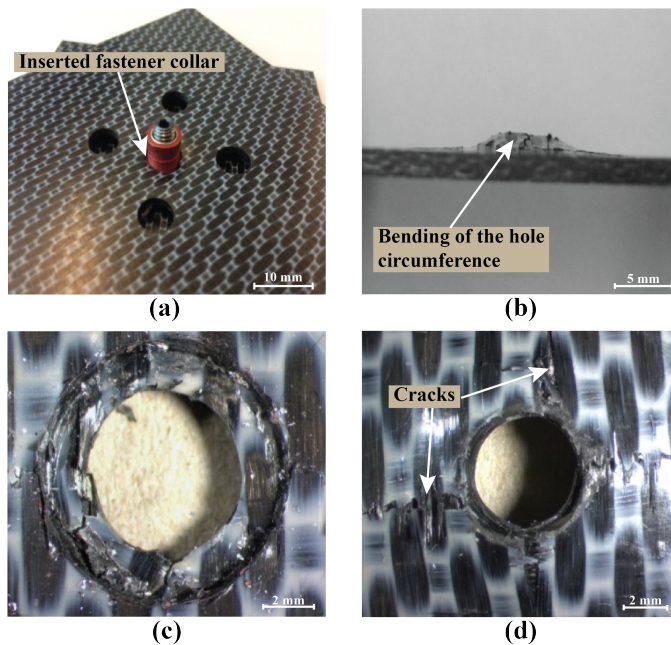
The Hi-Lok[®] collar (HL12V6) after the PT test (a) and the side (b), bottom (c) and top (d) view of fracture surface of bottom adherend after removing the fastener.
